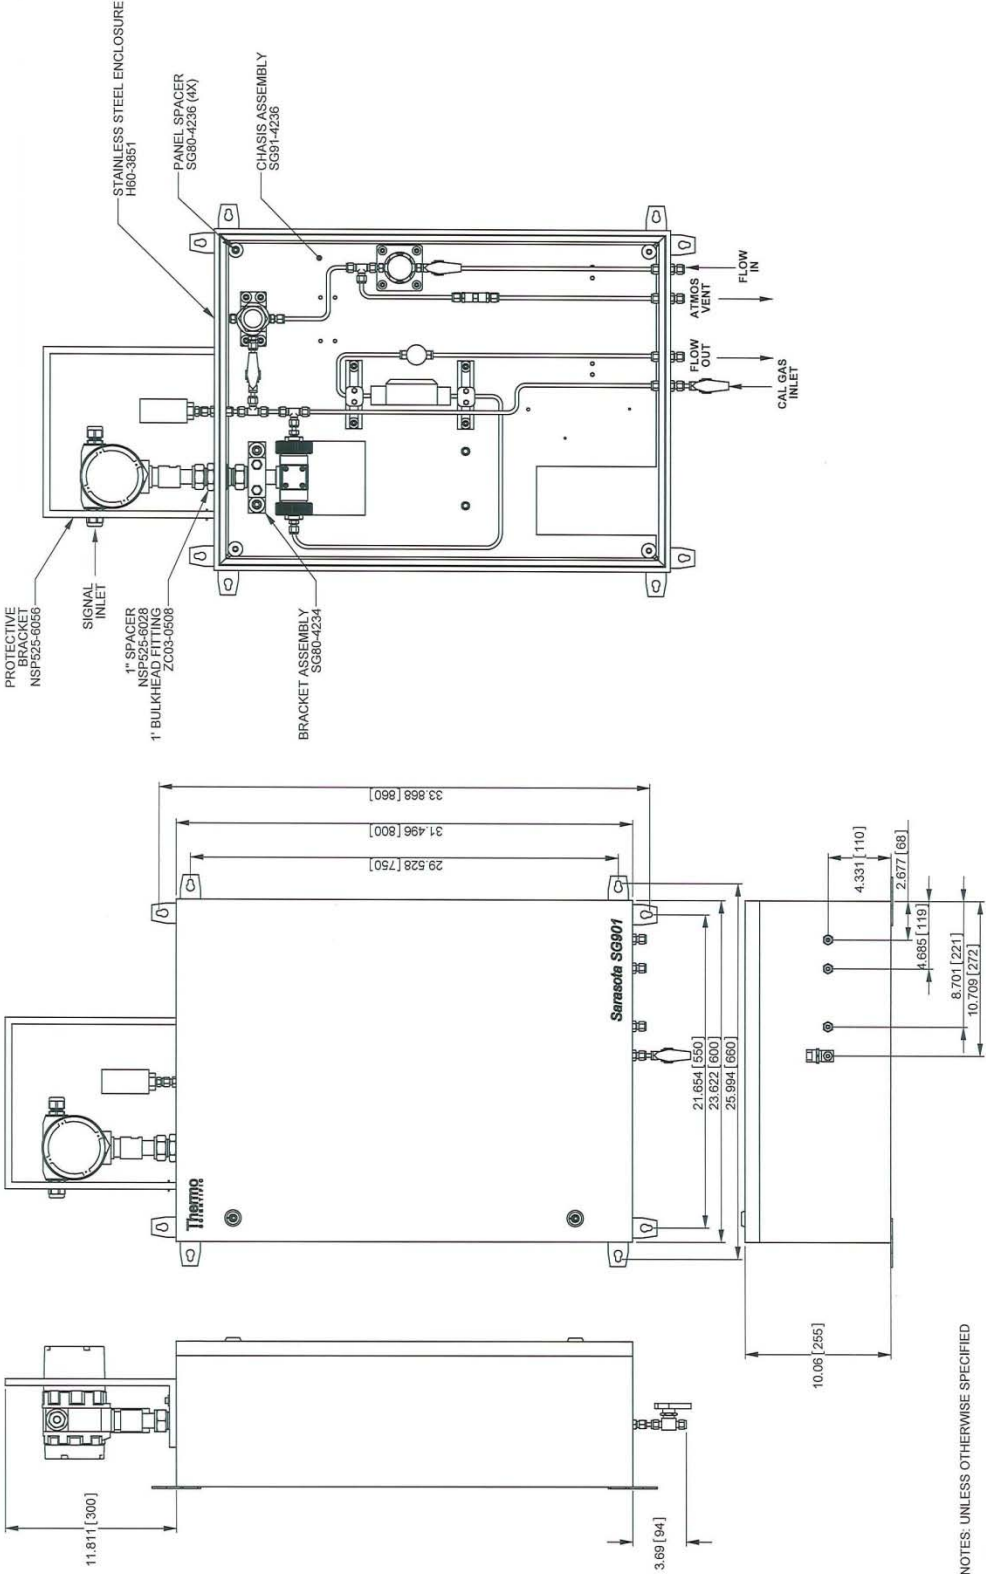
SG91-6003: General assembly drawing, HT wet gas system (sheet 2 of 3)
